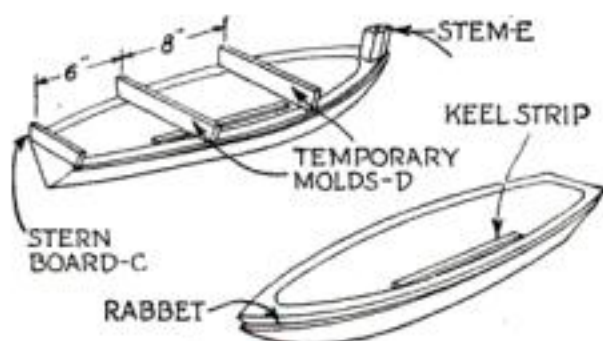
After block A is shaped, the stern board, stem, keel strip and molds are added
